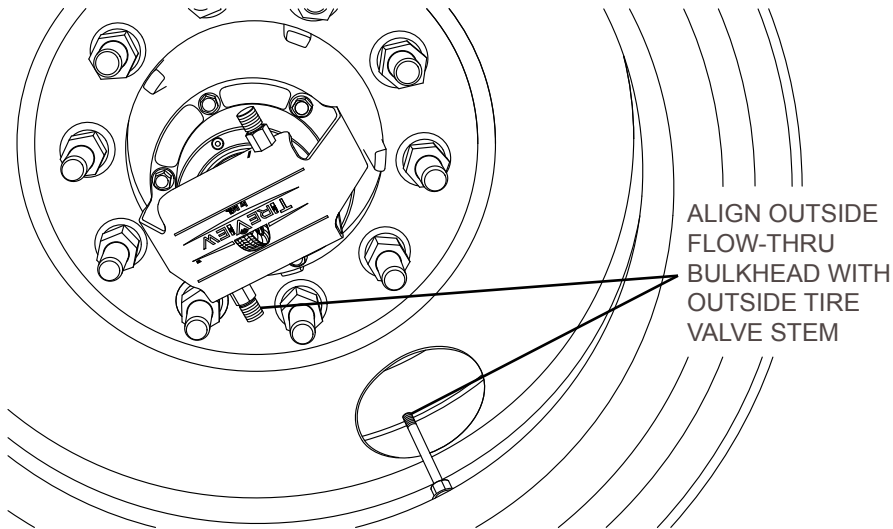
Outside Flow-thru Bulkhead Alignment with Valve Stem
